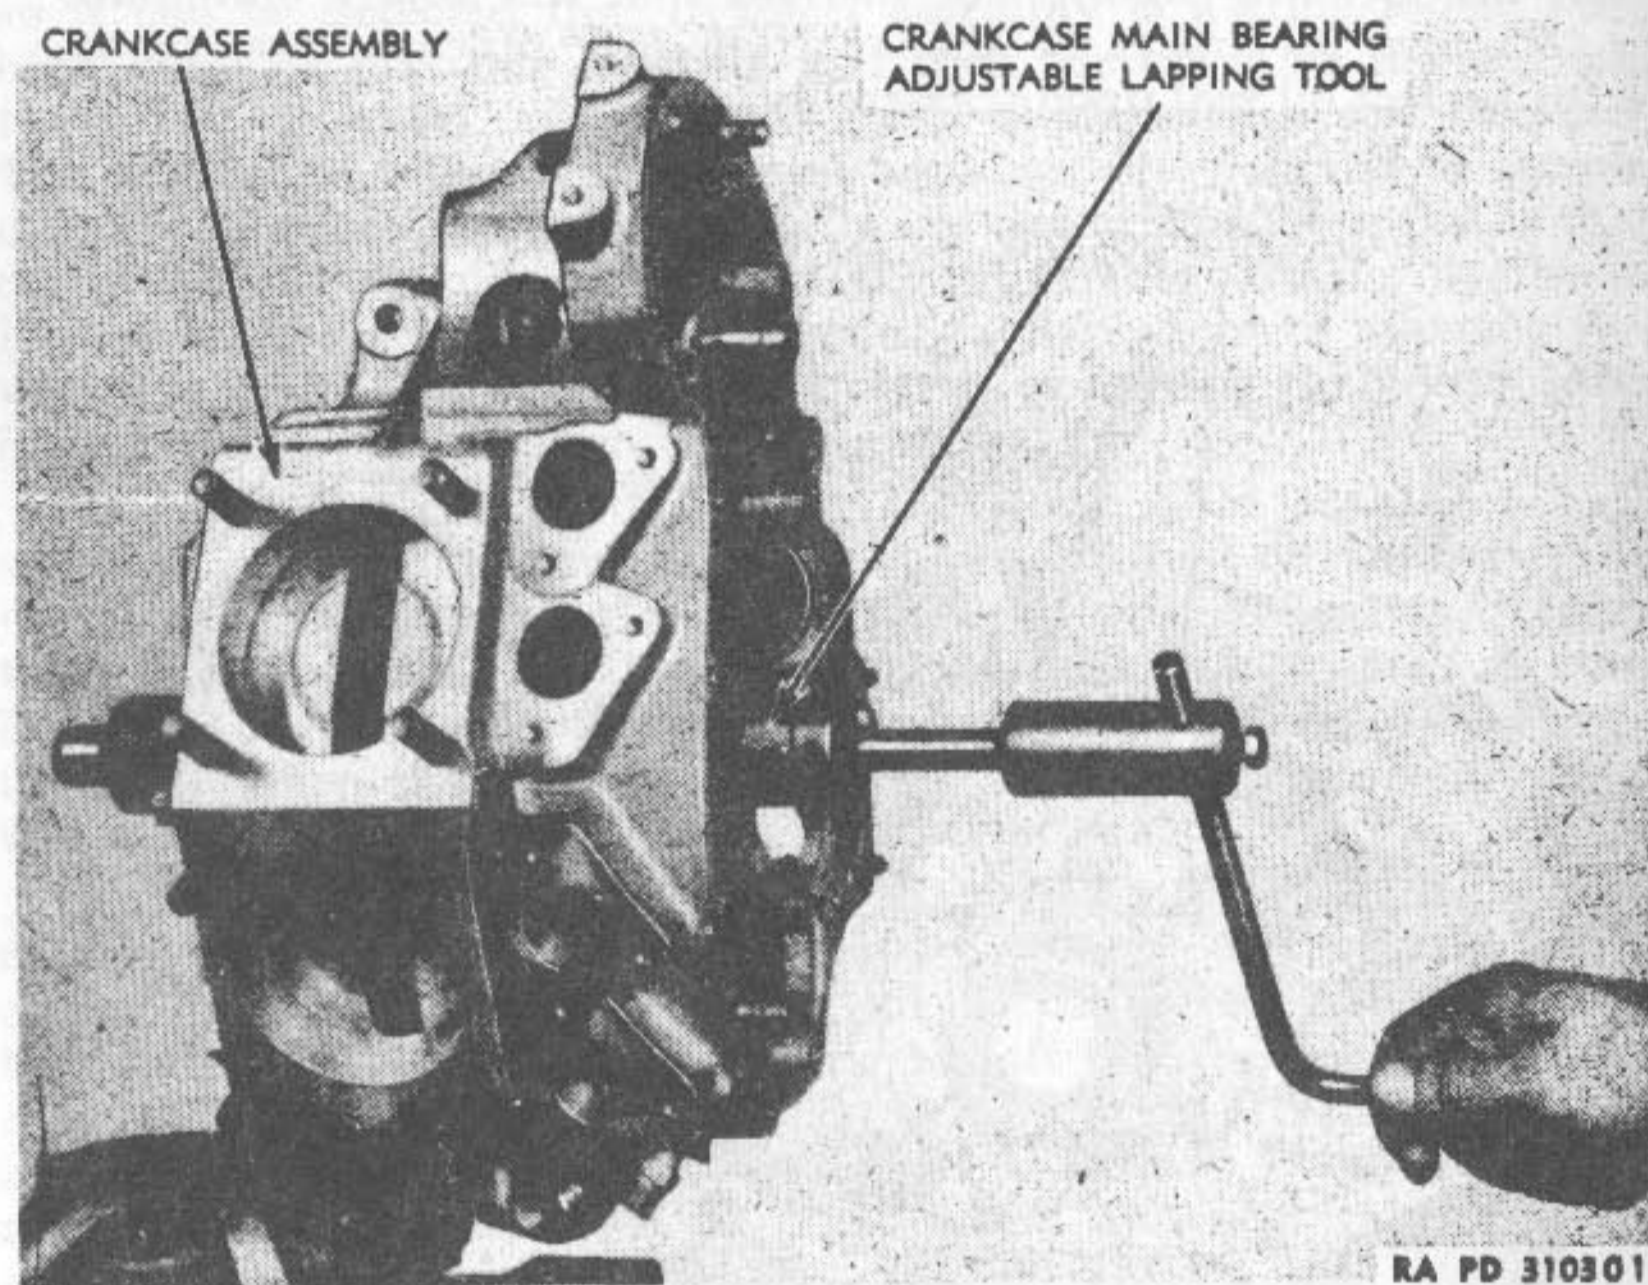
Lapping and Truing Crankcase Main Bearing Races with Lap (41-L-203)
